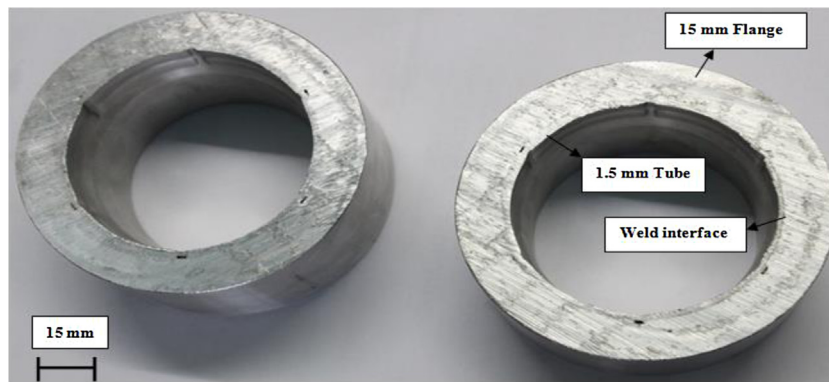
Laterally cut Al-6061 tube-flange EM expansion welded sample.
